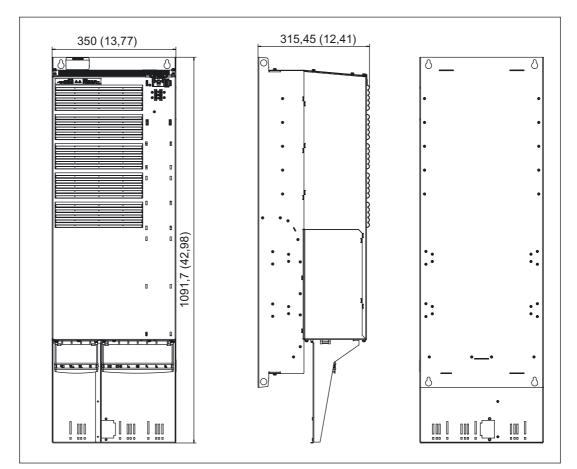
Dimension drawing: PM340 Power Module with Screening Kit, frame size FSF, all dimensions in mm and (inches)
